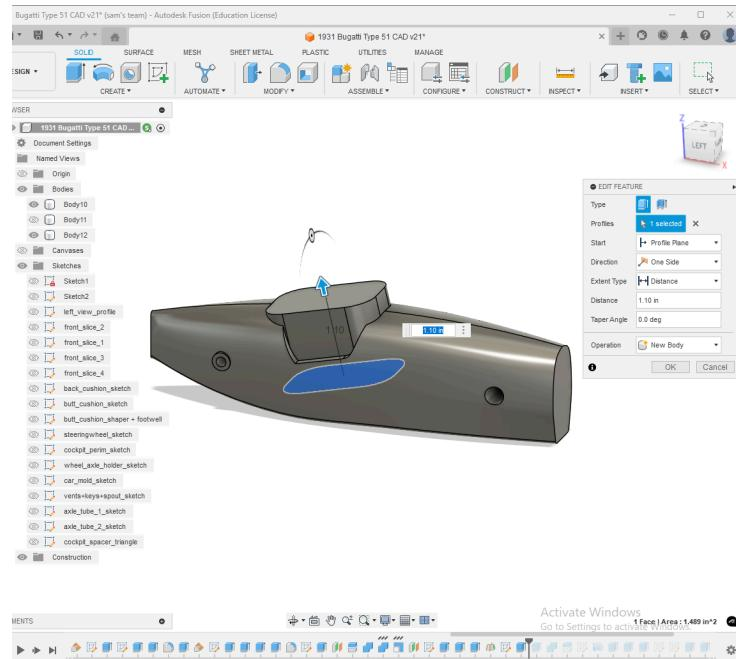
Extrusion of cockpit ‘pod’ spacer
